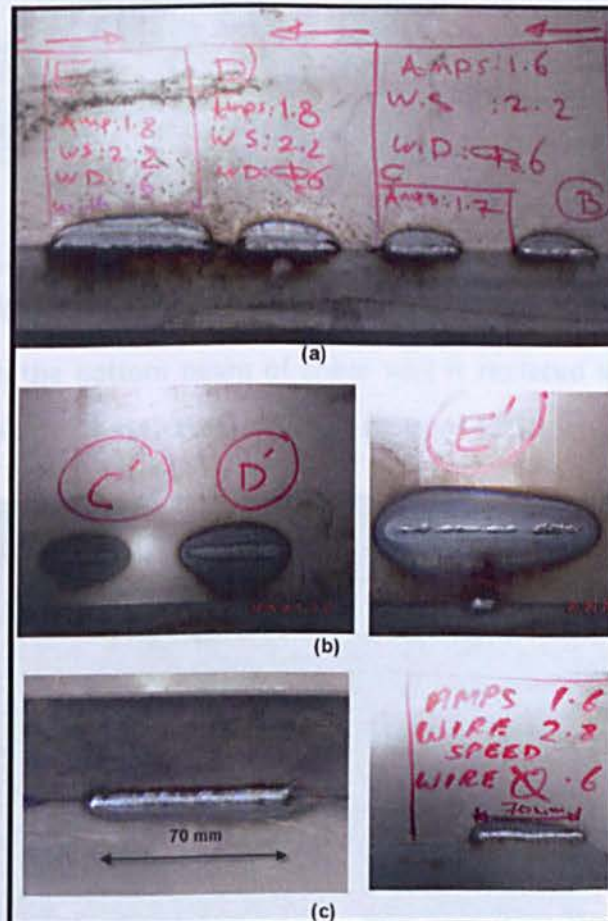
Different trials for welding of steel plate to fish plates and stiffeners to steel plate using MIG welding
